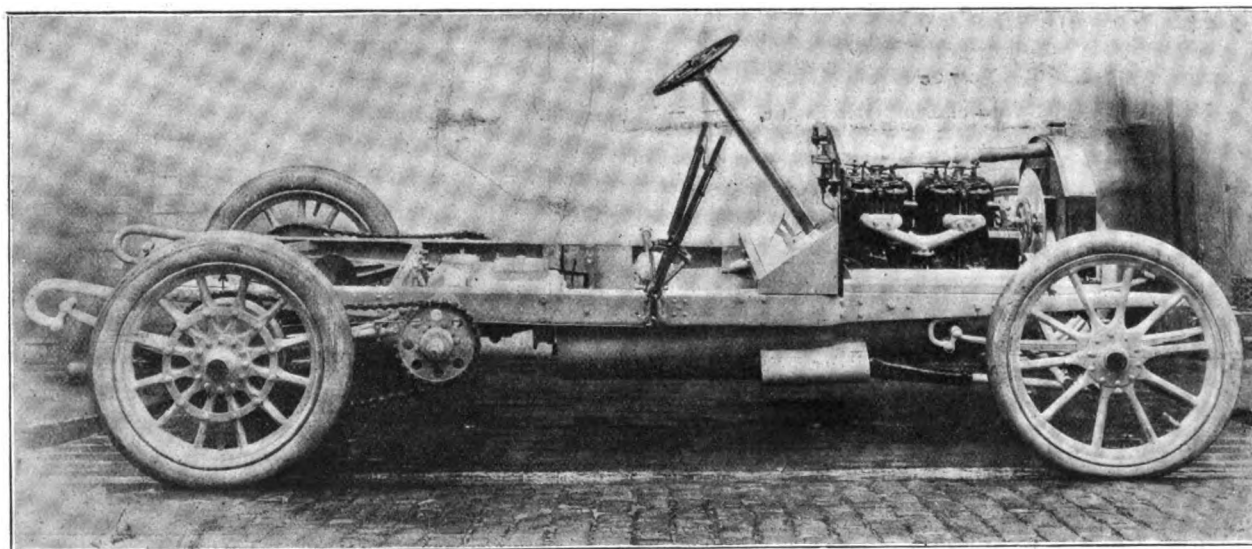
Chassis of Crossley 40-h.p. Car.
